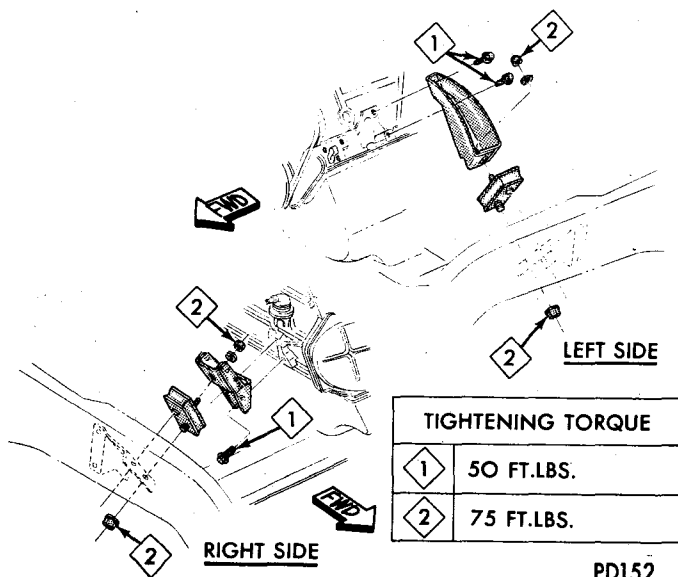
Engine Mounts—Front—225 Cubic Inch Engine Models W100-200-300
